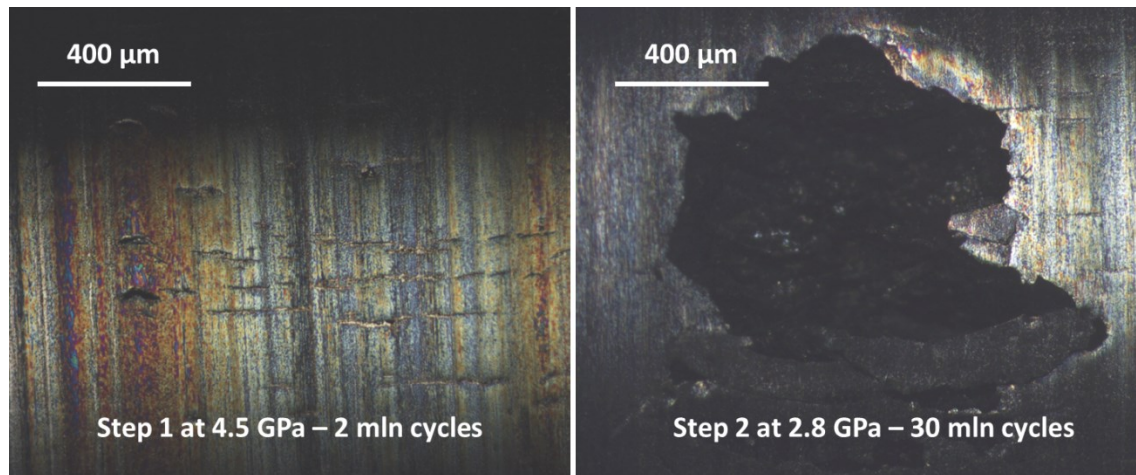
Test 22, roller surface after step 1 (left) and final pit failure after step 2 (right)
